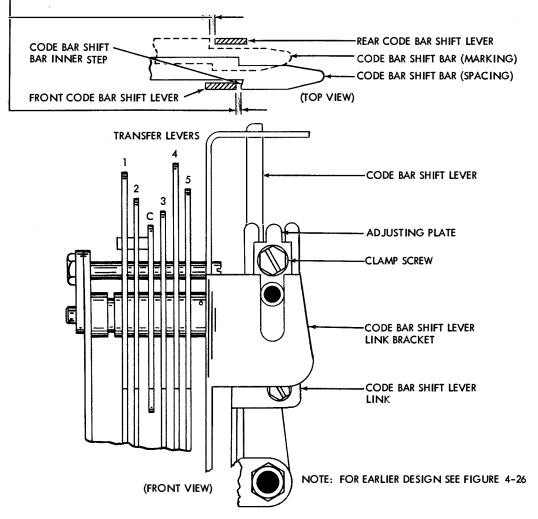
TYPING UNIT, CODE BAR SHIFT MECHANISM
